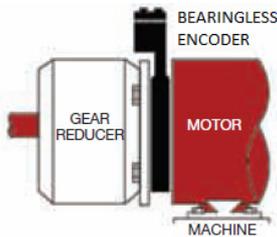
A bearingless encoder is a modular feedback device with different components that mount to the motor face and to the motor shaft
